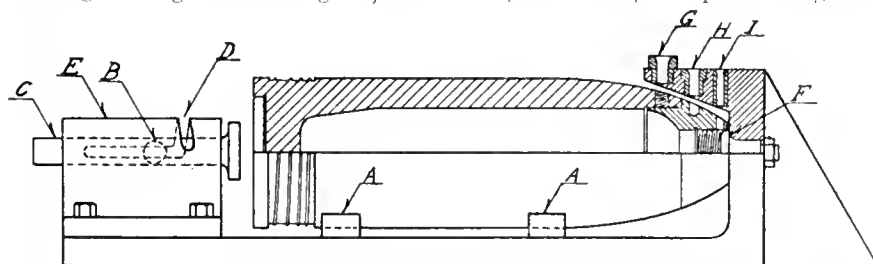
JIG FOR DRILLING HOLES IN SHELL NOSE.
